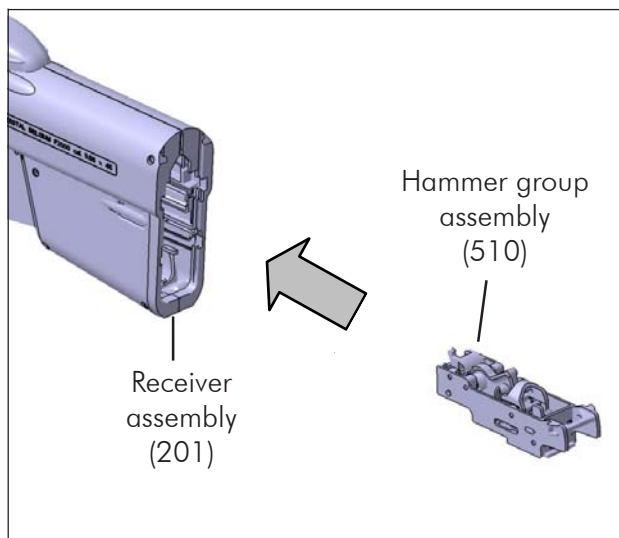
a - Reassembly of the hammer group assembly (510)
